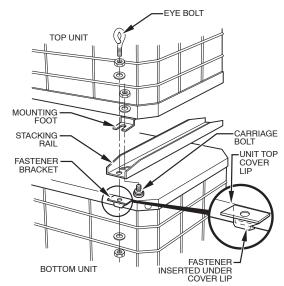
Securing Fastener Brackets, Mounting Feet, and Stacking Rails
